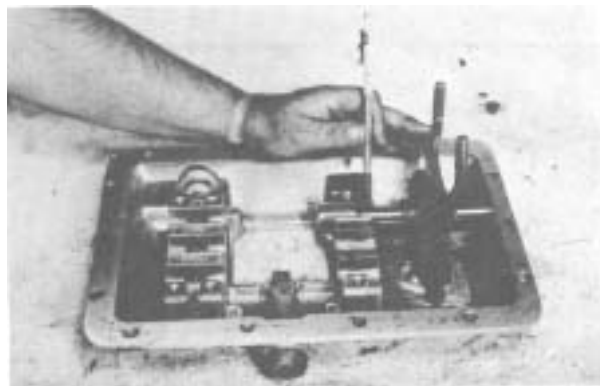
Using a small magnet remove the 1st and reverse shift fork rod lock pin.
